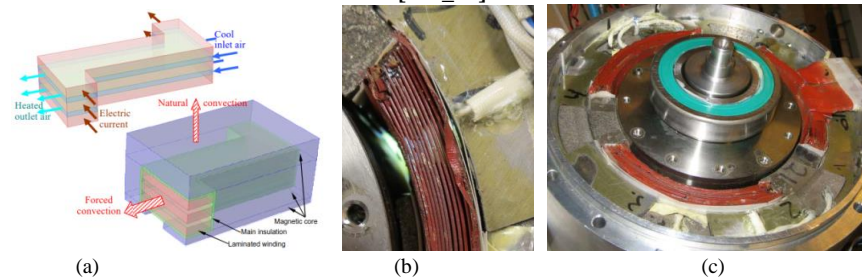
Laminated winding with electric conductive strips and air channel cooling, (b) zoom in prototype laminated winding, (c) machine prototype [Rei_14]
